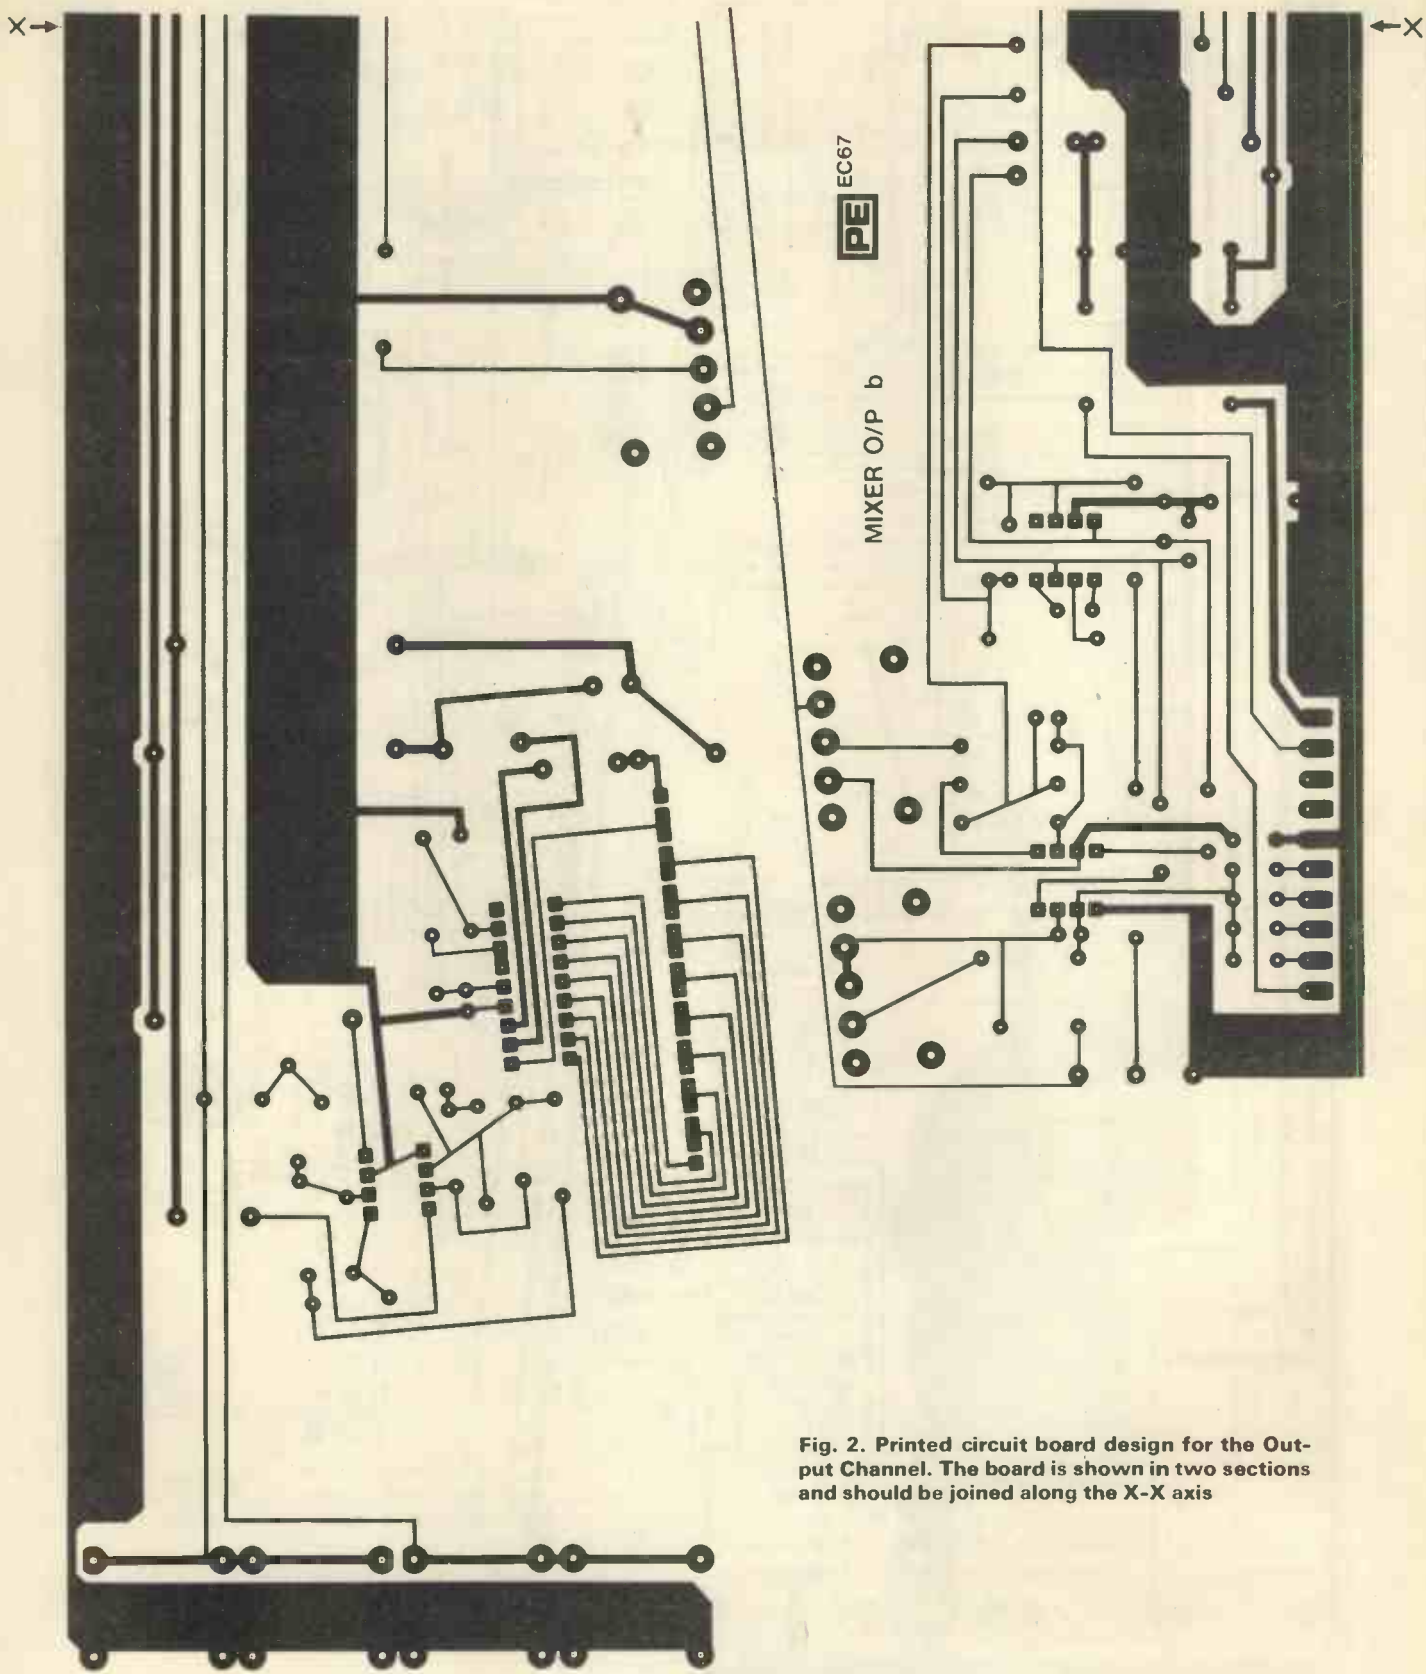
Printed circuit board design for the Output Channel. The board is shown in two sections and should be joined along the X-X axis
